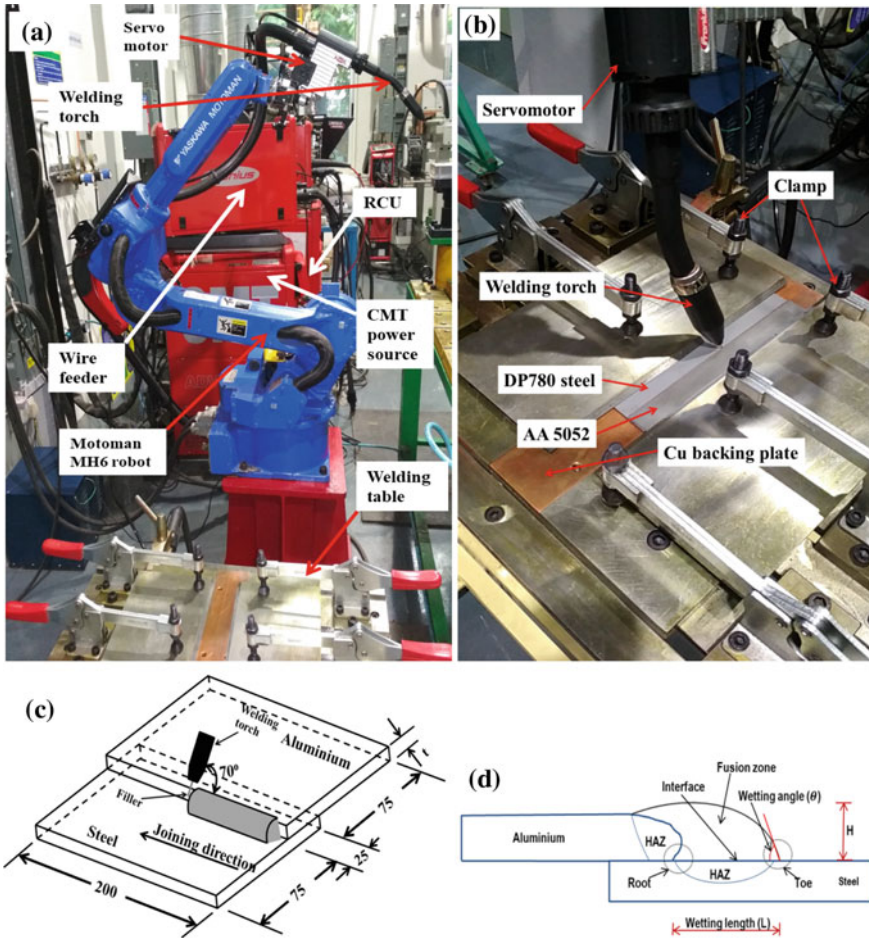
a CMT brazing machine; b experimental set-up; c schematic of experimental set-up and d schematic of cross section of the weld-brazed lap joint
